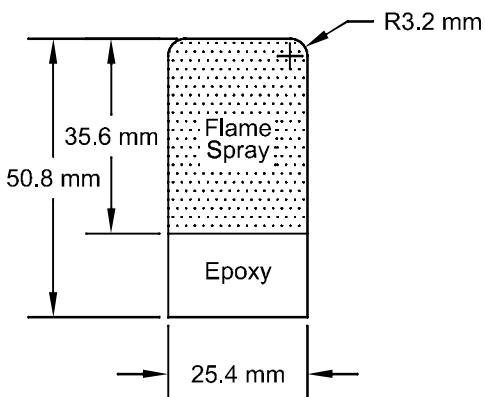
A drawing of the flame-sprayed epoxy cylinders used in the experiments.
